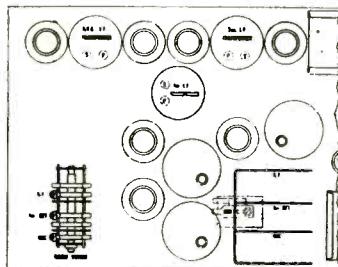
Chassis view of the G.E. K-126, showing location of trimmers.
